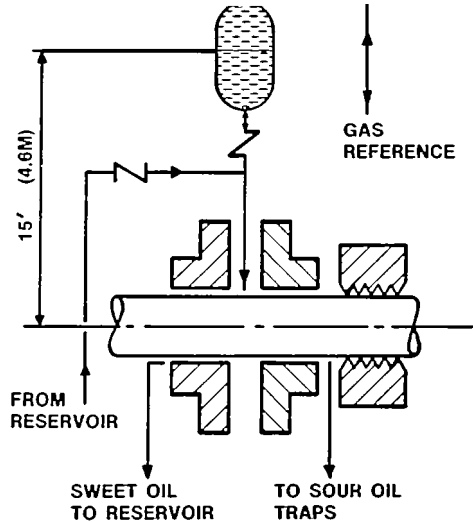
Oil film seal assembly. (Dresser-Rand Company, Olean, N.Y.)
